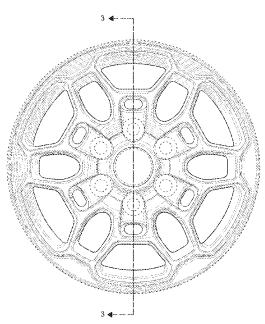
is a front elevation view of a wheel rim embodying the new design;
